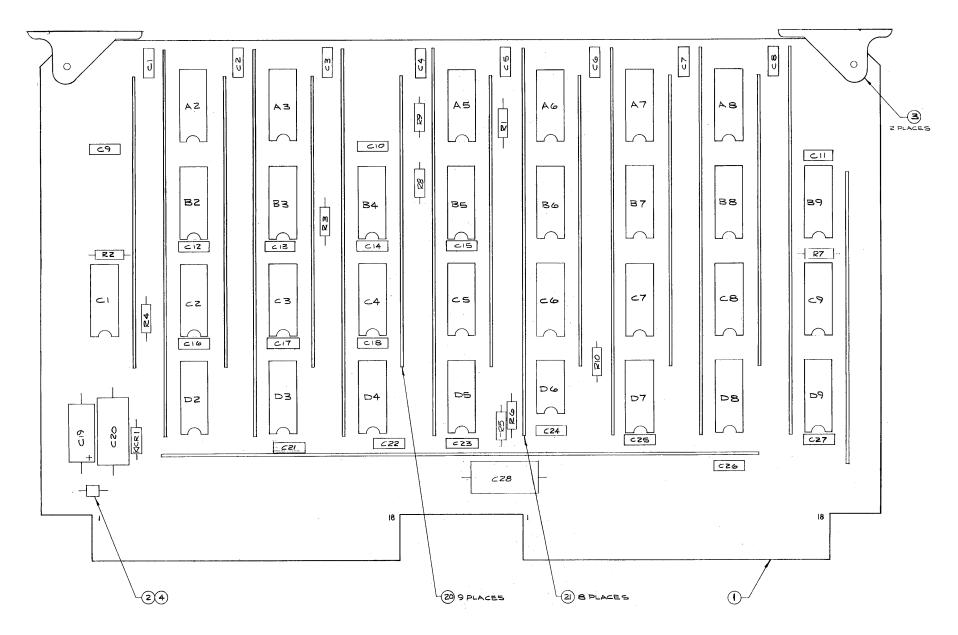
Sync Card Assembly Dwg. No. 1040353E
